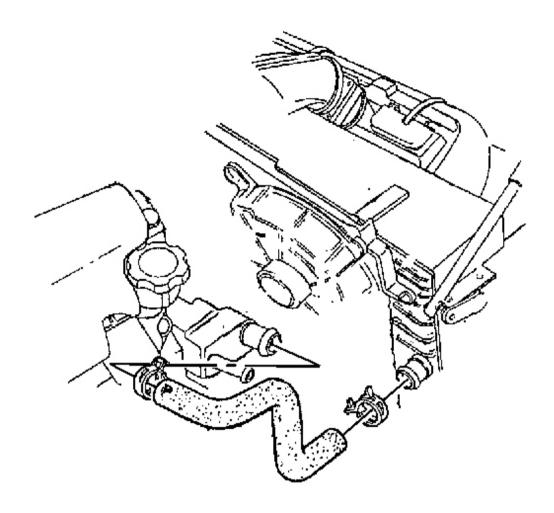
Radiator Outlet Hose & Radiator Outlet Courtesy of GENERAL MOTORS CORP.
